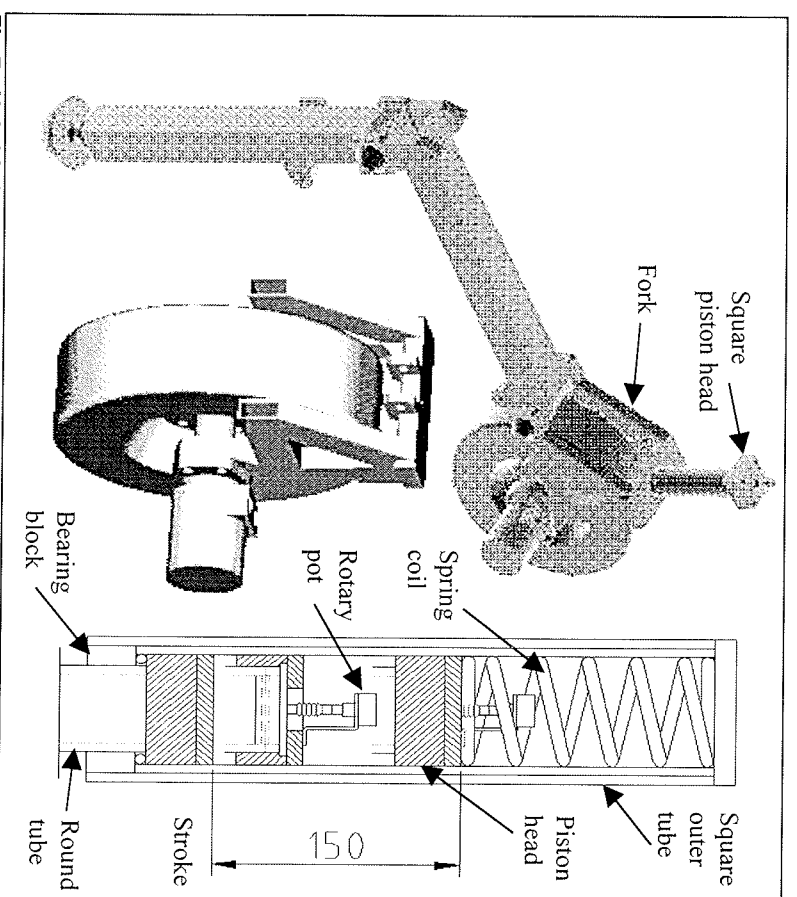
Hybrid "leg-wheel" design showing fork, motor and suspension
